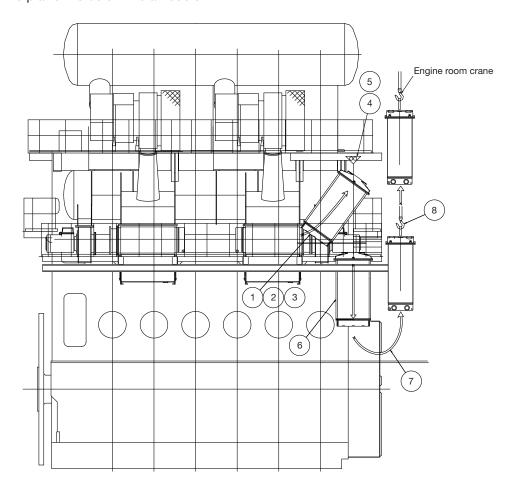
Crane beam for overhaul of air cooler, turbochargers located on exhaust side of the engine
